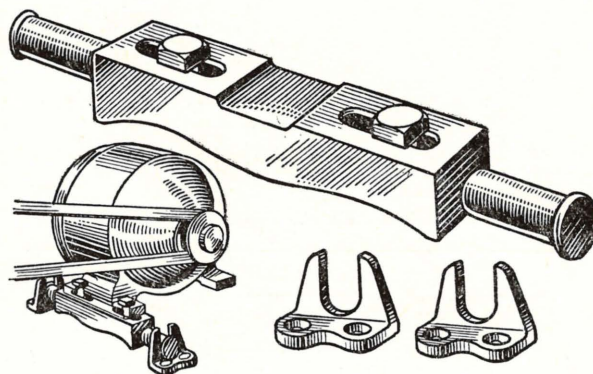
This type of motor mounting permits the motor to be moved quickly from one machine to the other
